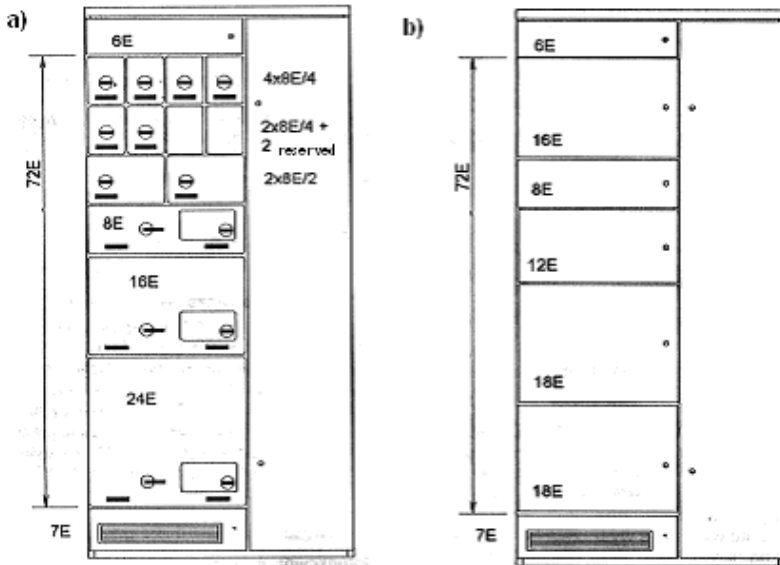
Examples of MNS switchboards with module sizes [2,72]: a) MNS section with withdrawable units, b) MNS section with fixed-mounted units; E – basic dimension of a module, E = 25 mm
